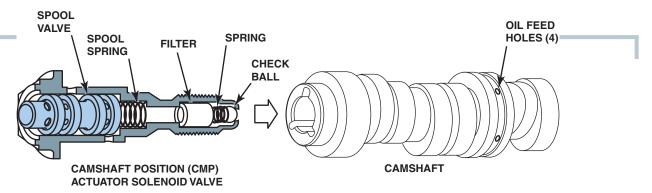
A camshaft position actuator used in a cam-in-block engine.
